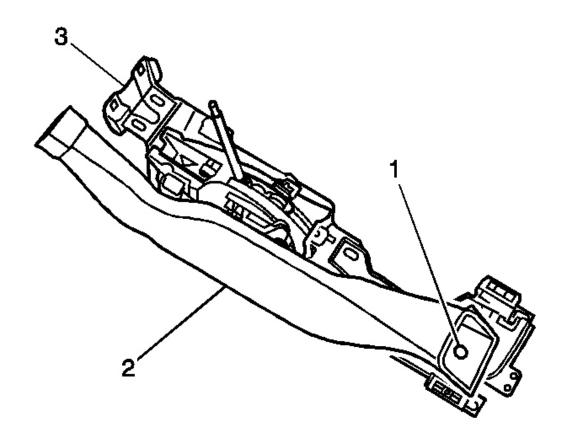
Remove the air outlet duct-rear Courtesy of GENERAL MOTORS CORP.
